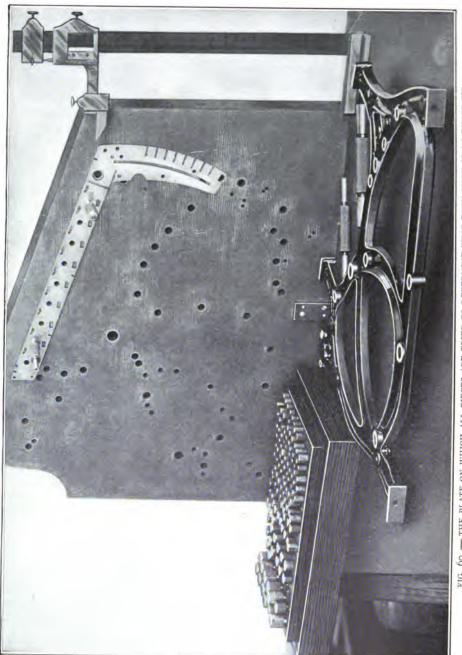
THE PLATE ON WHICH ALL PIECES ARE TRIED TO DETERMINE THAT EACH HOLE IS AN EXACT FIT
